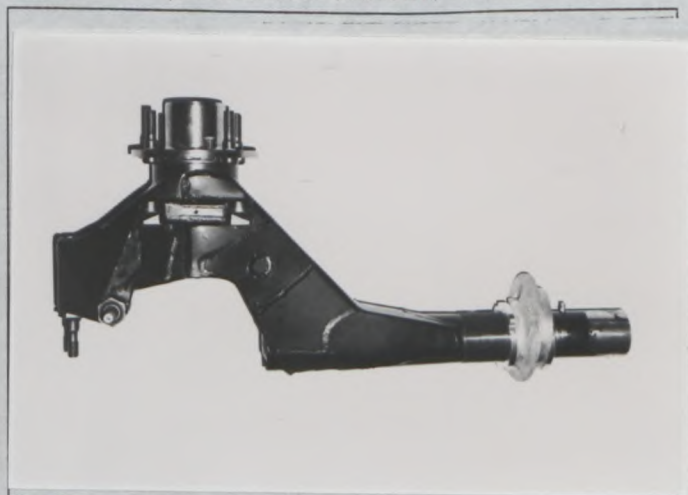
REAR ADJUSTABLE STABILIZER ASSEMBLY
